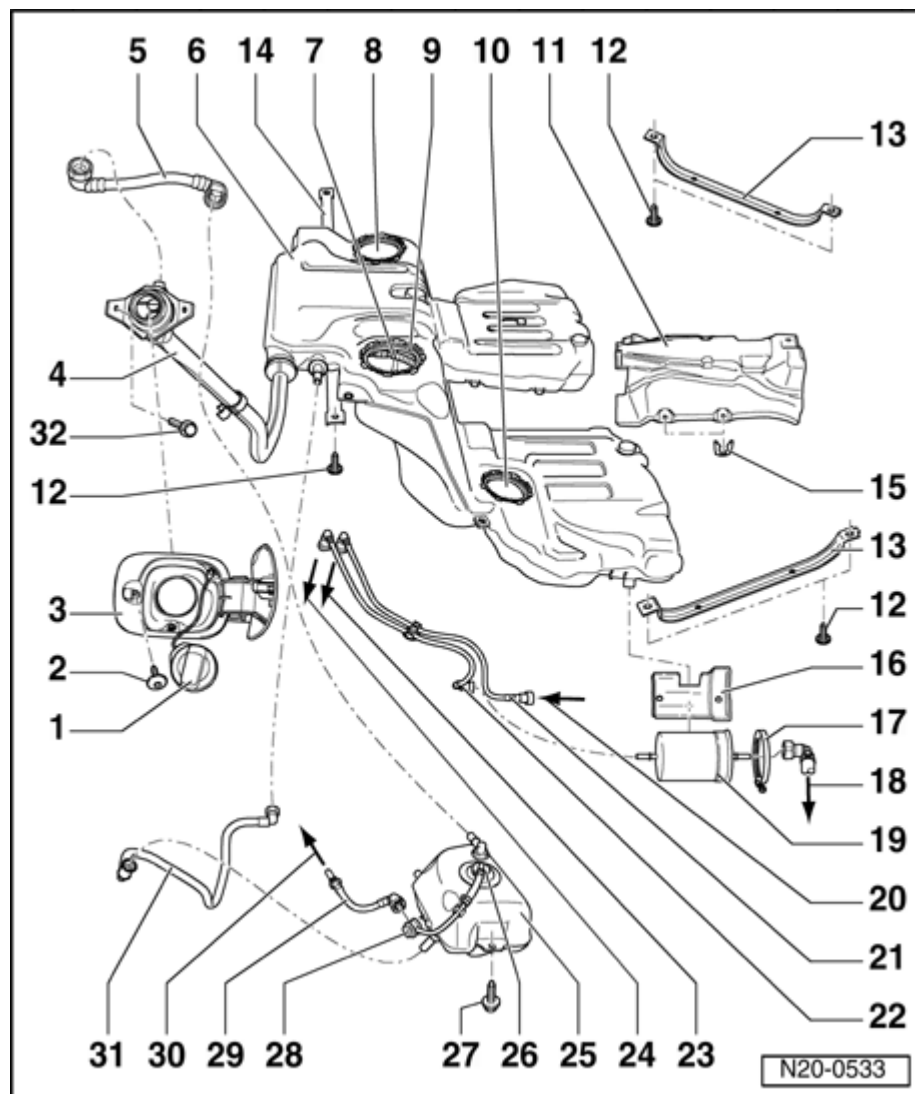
Fuel Tank With Attachments And Fuel Filter Remove/Install Components
